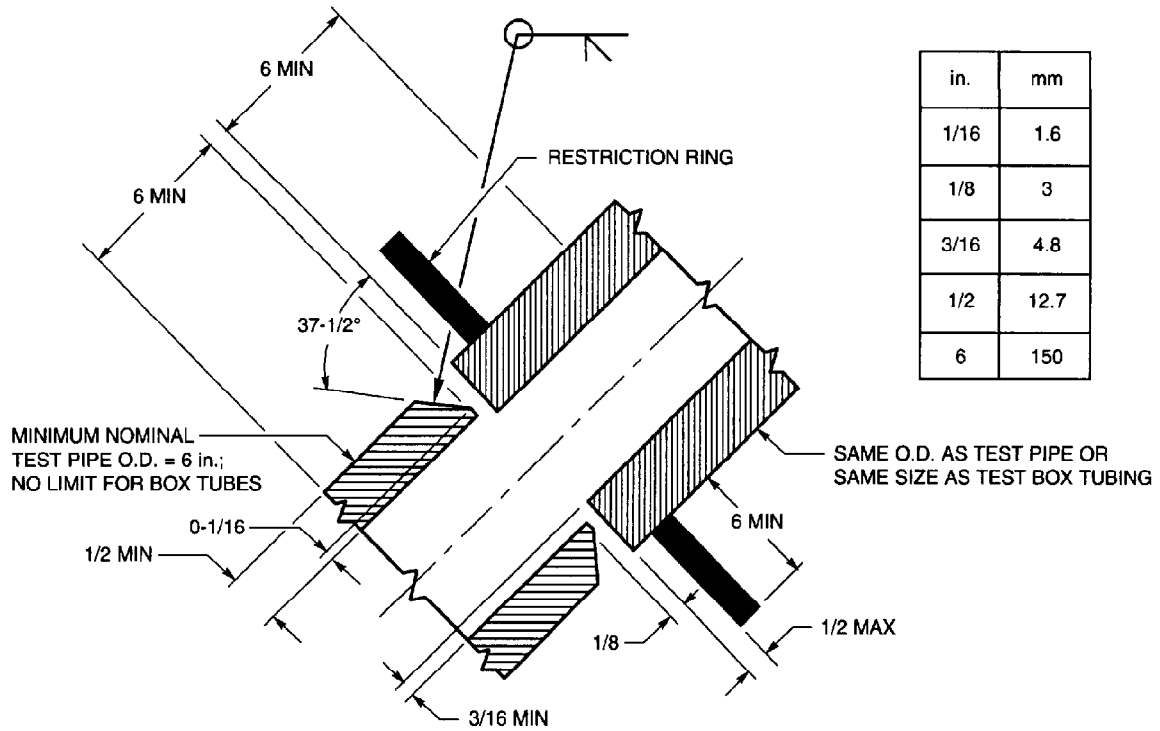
Test Joint for T-, Y-, and K-Connections without Backing on Pipe or Box Tubing—Welder and WPS Qualification (see 4.12.4.1 and 4.26)
